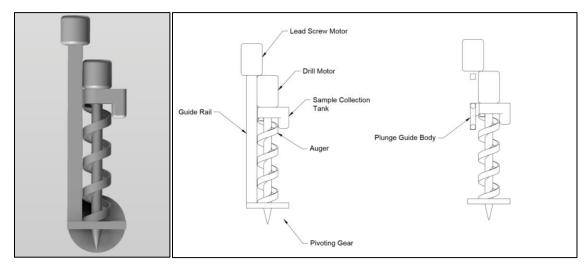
3: Auger Housing CAD Assembly and Drawings
